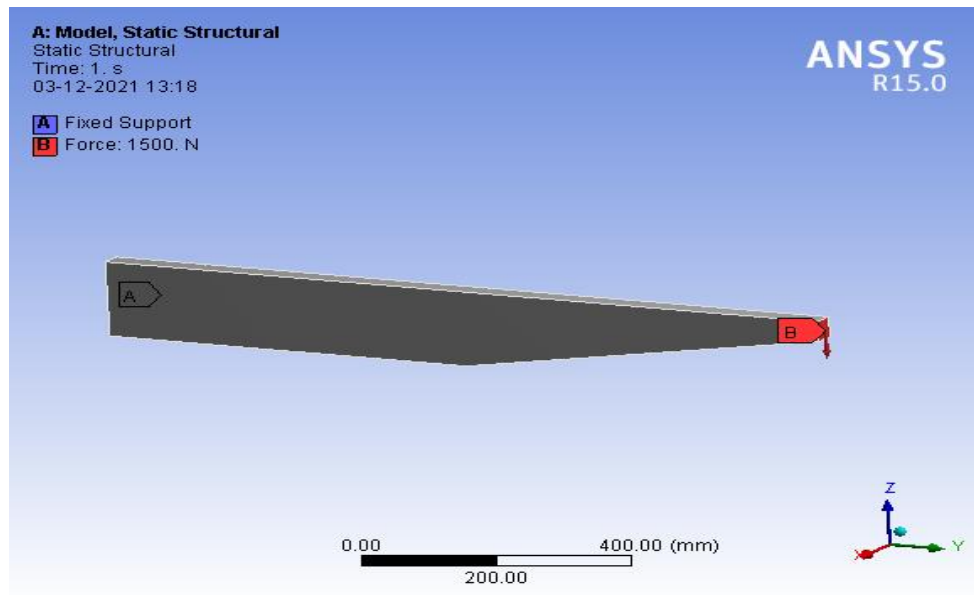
Boundary conditions welding arm at load 1500N
